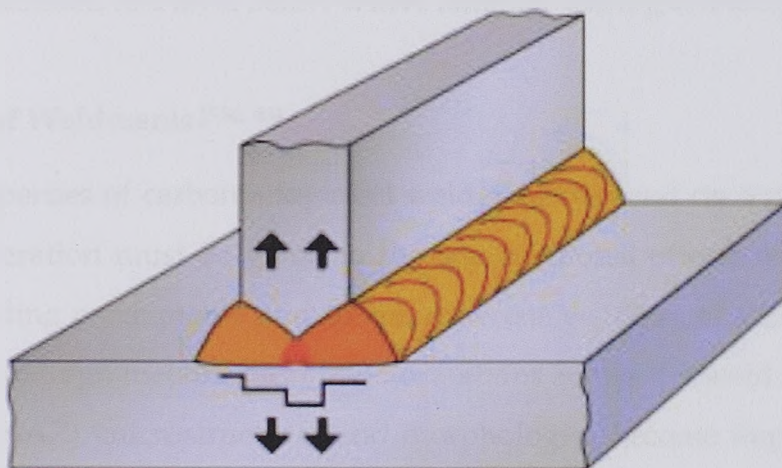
lamellar tearing in T butt weld. <sup>[81]</sup>
